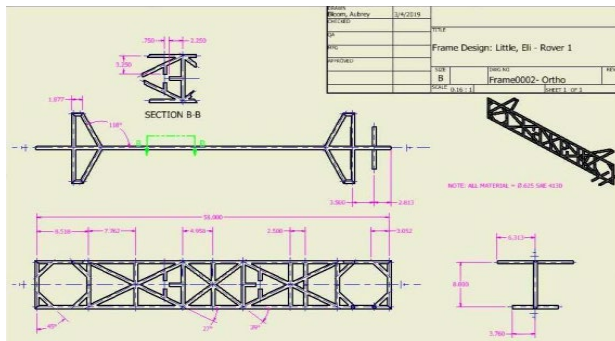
Dimensional CAD drawing of the frame in Autodesk Inventor
